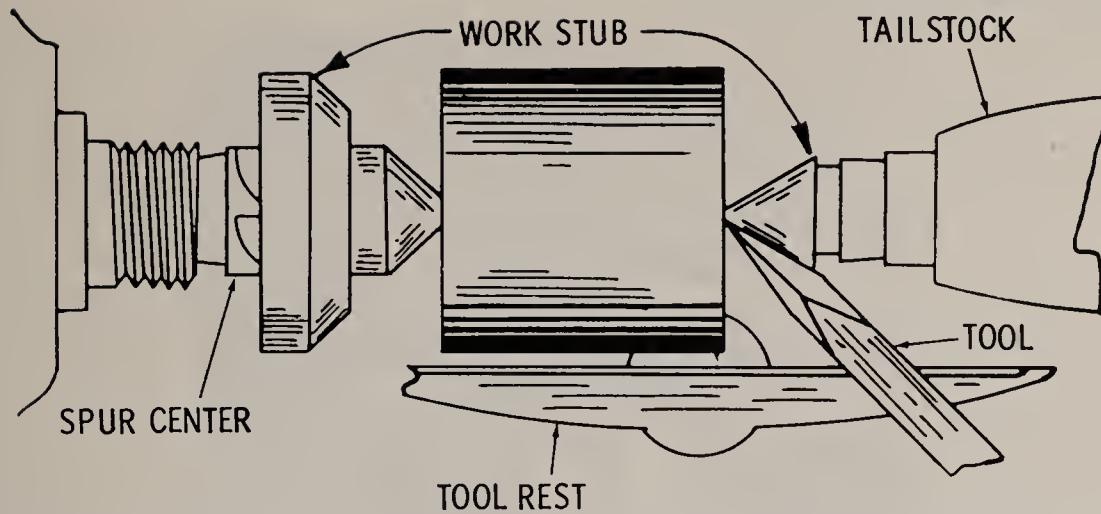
Cut a wide groove at each end with small skew chisel, holding tool as for cutting shoulders. Pare off end to correct dimension, keeping groove well cut out and clear. Continue cut until diameter is about $\frac{3}{32}$ inch at tailstock and $\frac{1}{8}$ inch at headstock. Be sure ends are smooth and clean.
